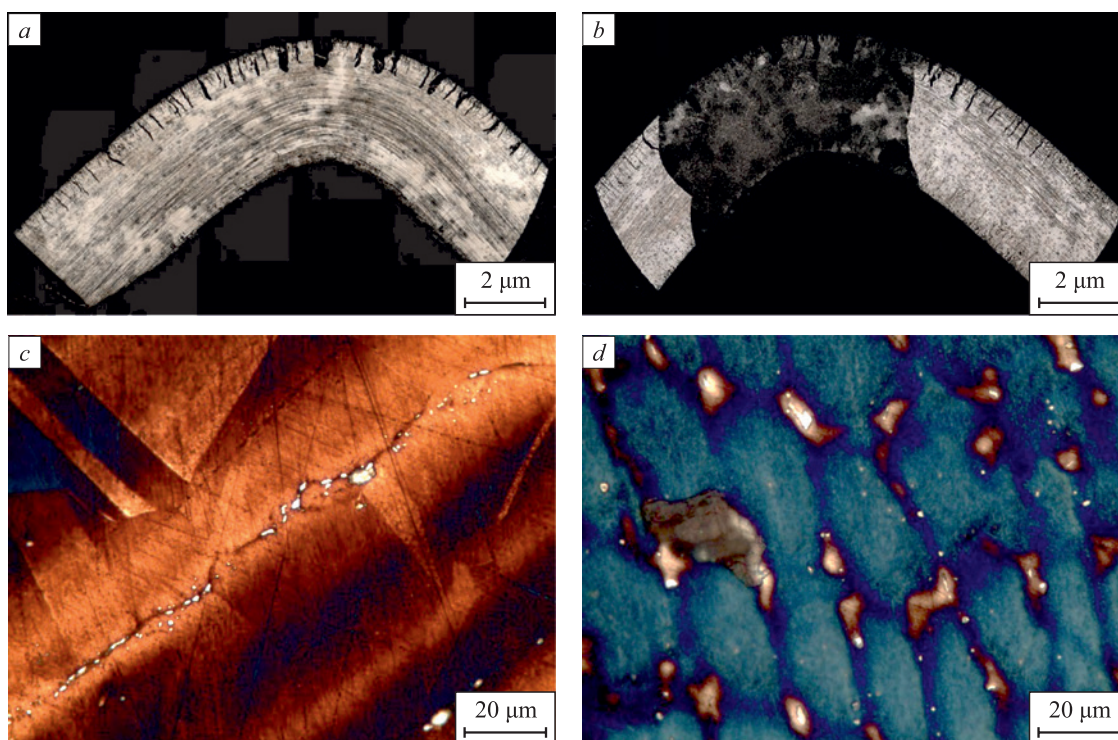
Intergranular cracks in the base metal (*a*) and in the welded joint (*b*), and images of excess phases in the base metal (*c*) and in the welded joint (*d*)
